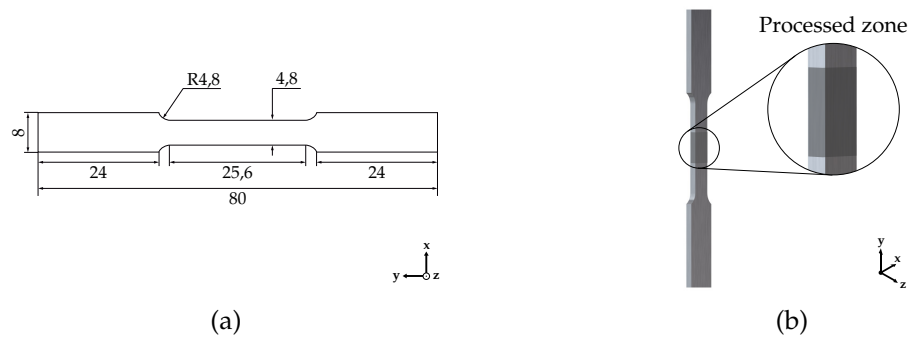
Uniaxial tensile test specimen: technical drawing [mm] (a); processed zone closeup (b)
